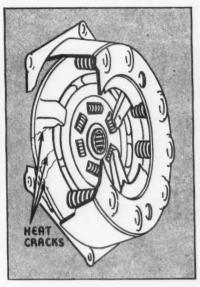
Excessive heat caused the cracks in this pressure plate.
